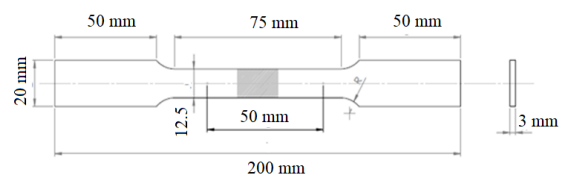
Dimensions of tensile test sample according to ASTM E8 standard
